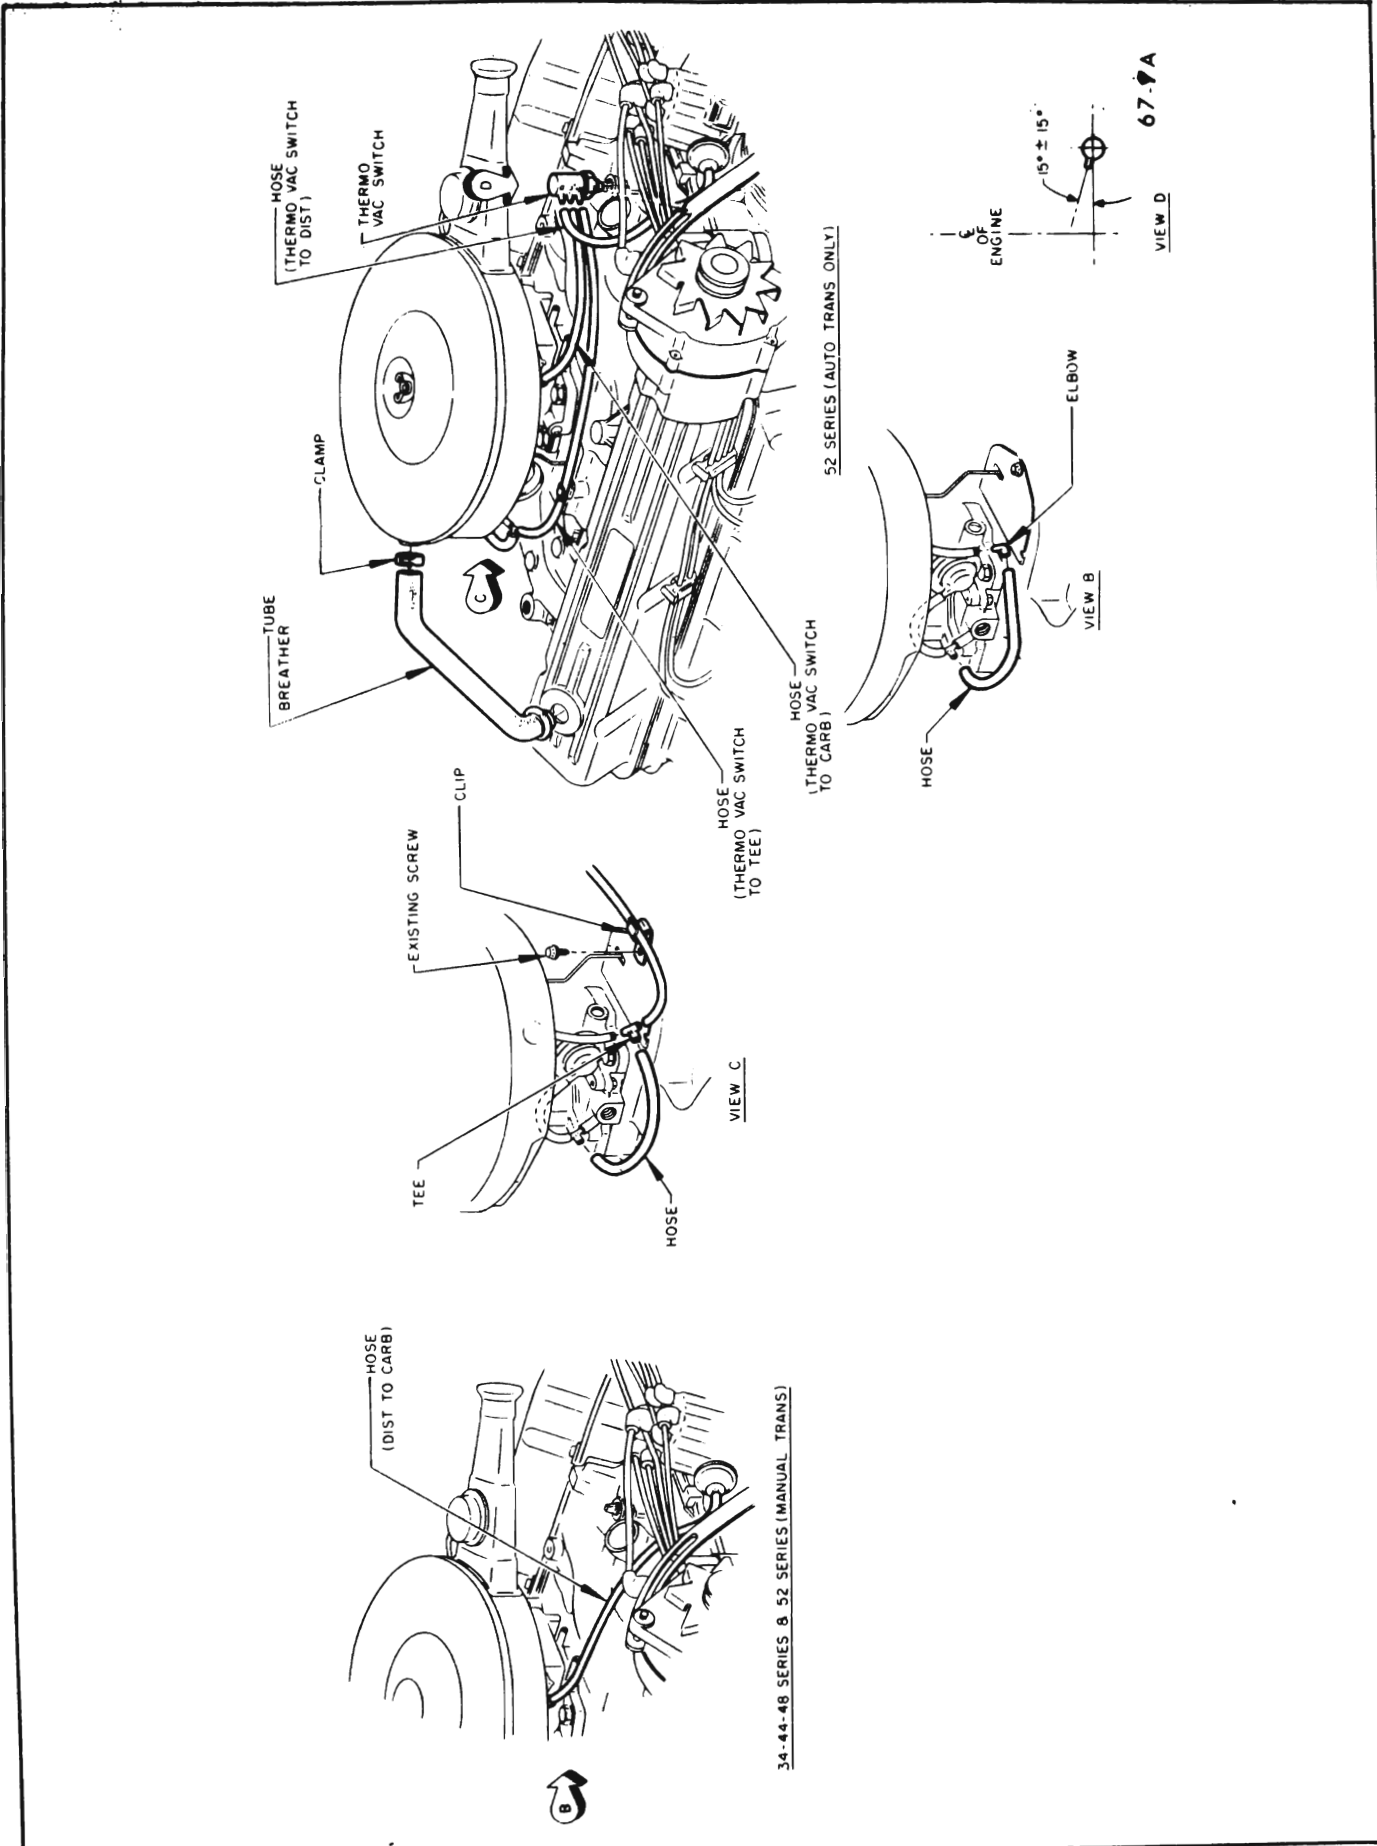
Thermo Vacuum Switch Hose Installation - 350 2-Barrel Engine
